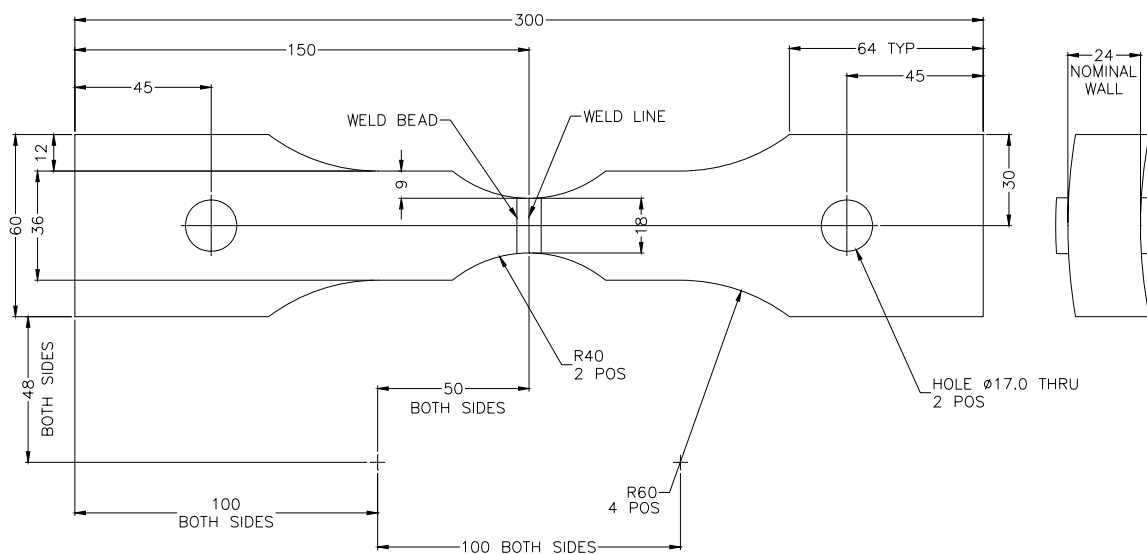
Geometry and dimensions of the waisted tensile specimen.
